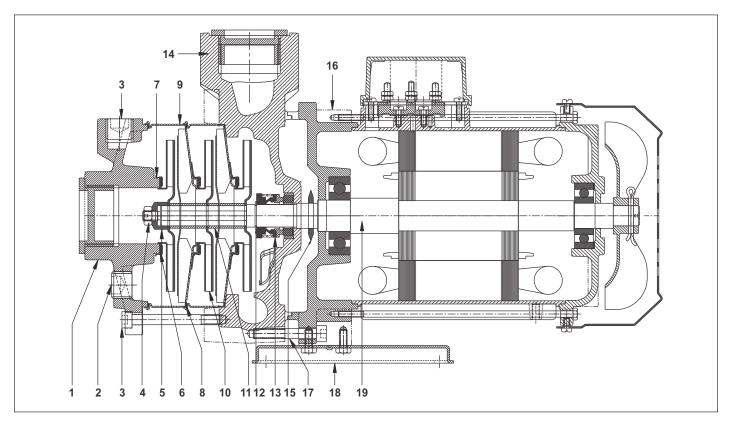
SECTIONAL DRAWING OF MH, MHI, MHN 10,15 & 25 PUMP
